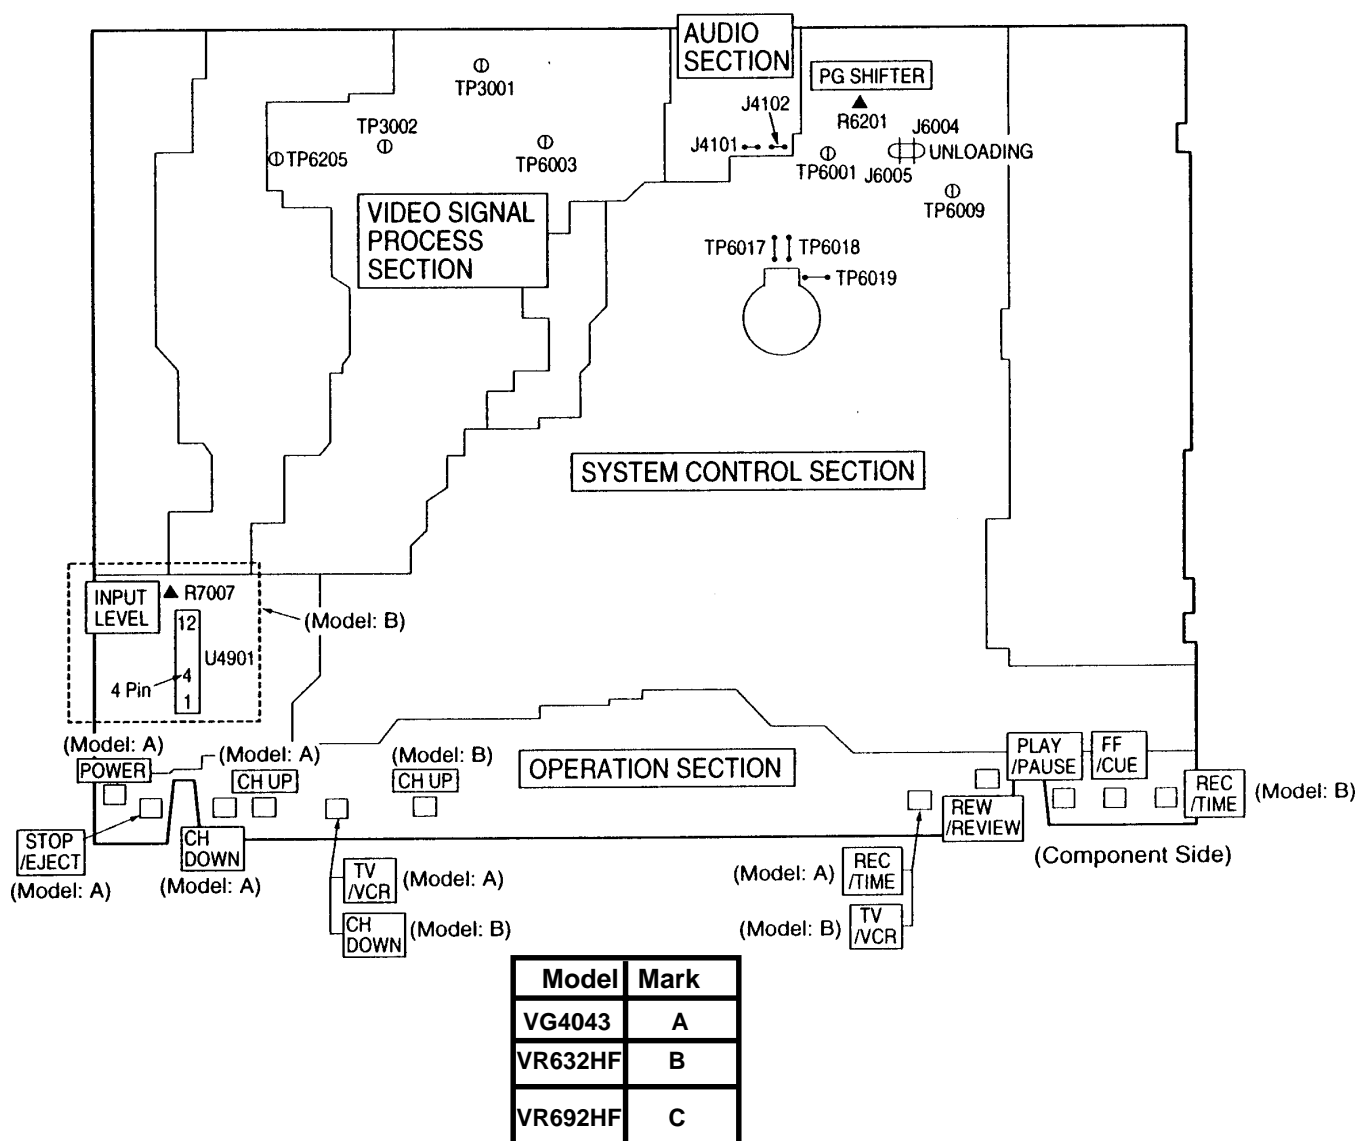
Main Circuit Board Test Point/Control Location (Component Side)
